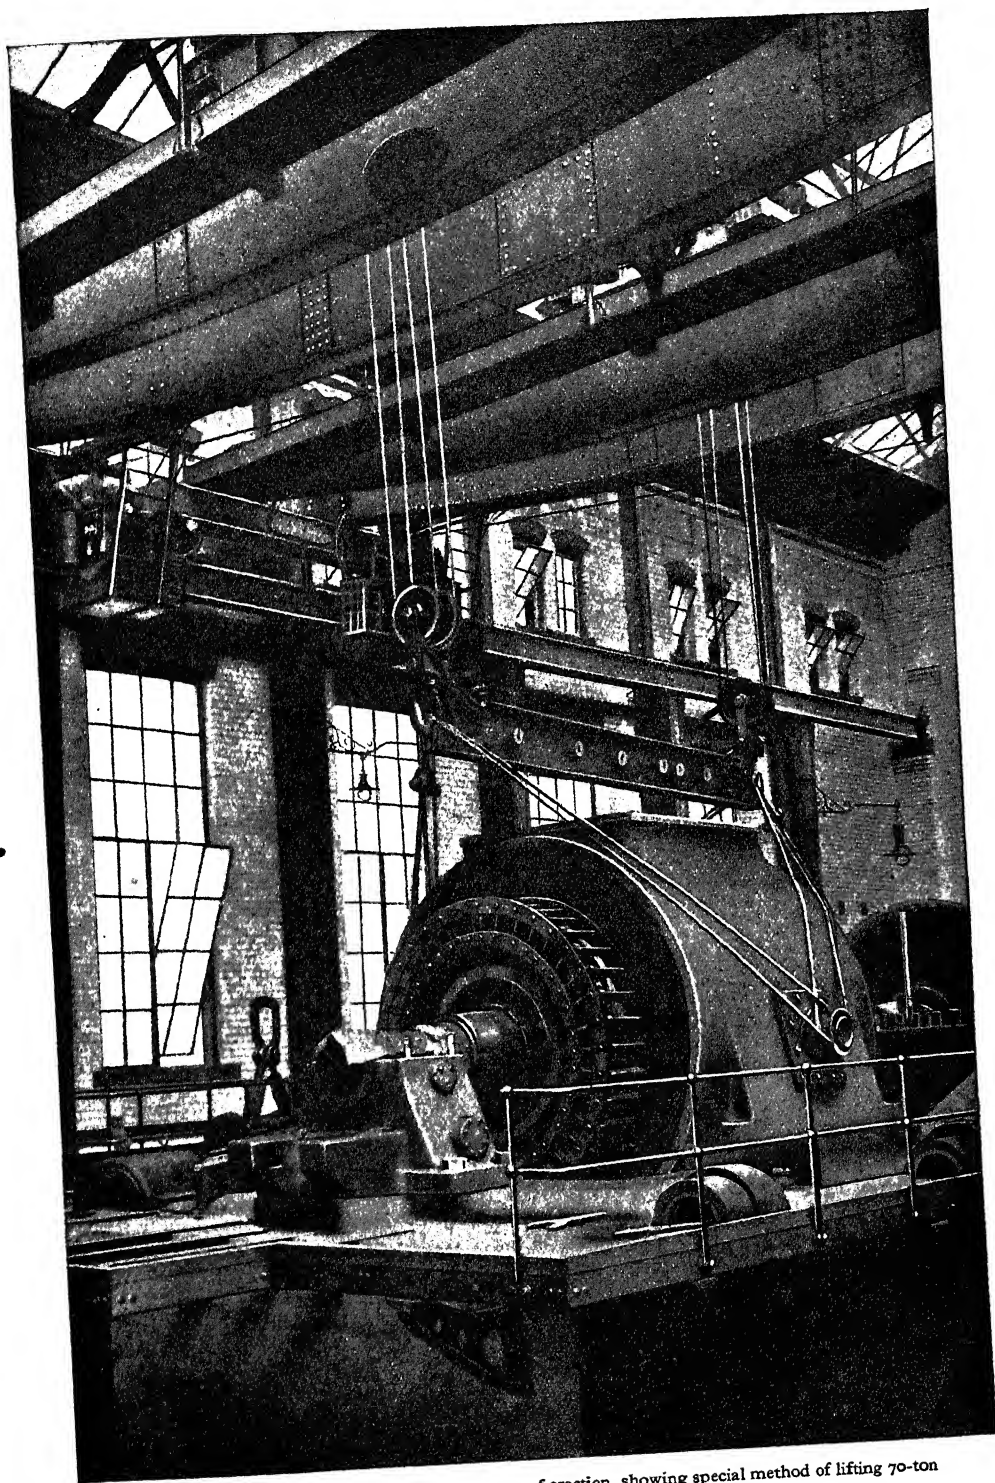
20,000-kw. Turbo-generator in course of erection, showing special method of lifting 70-ton stator by two cranes, as neither crane by itself could lift the piece
